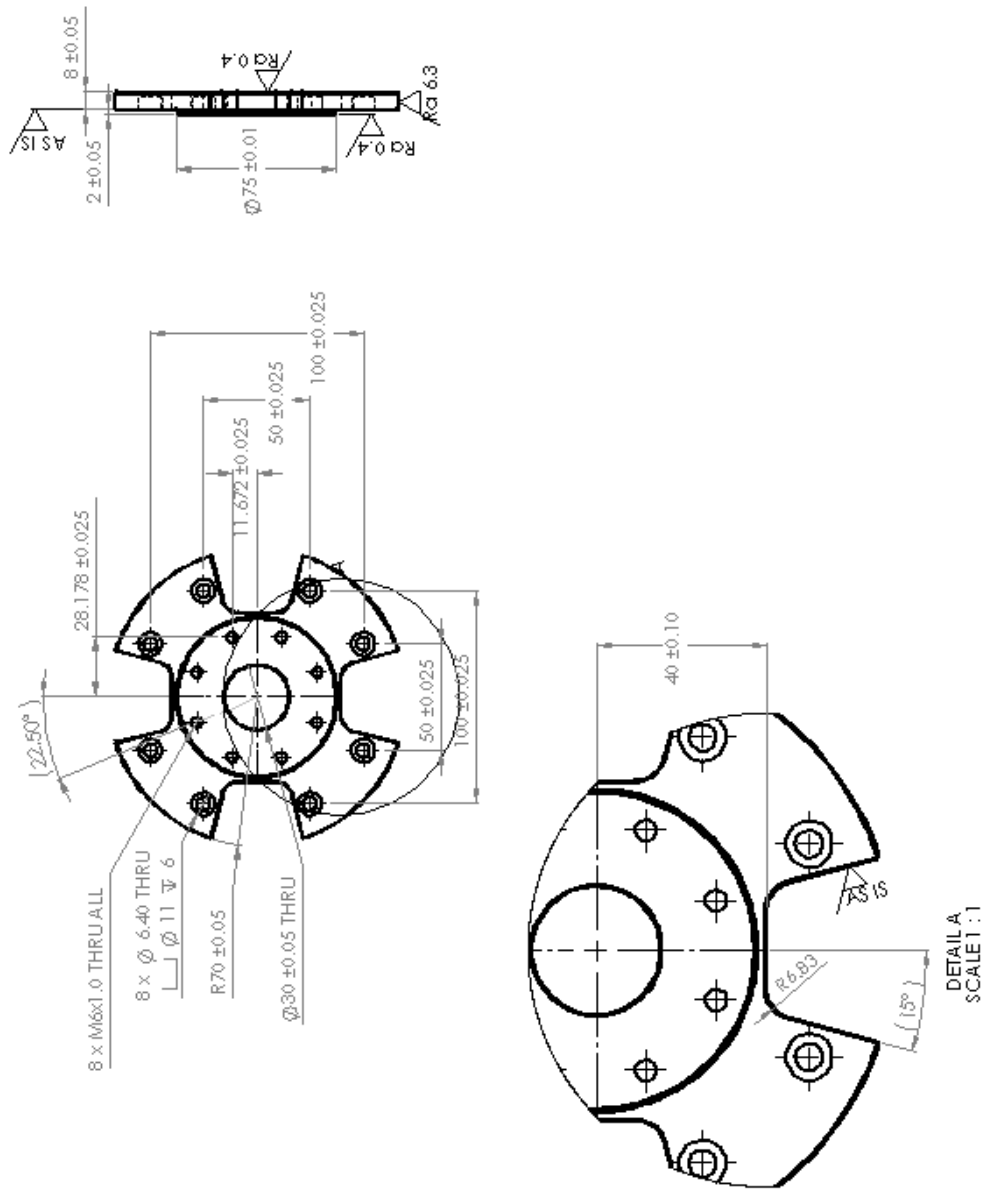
Hexapod to System 3-R tool changer connection plate. Material Al7060
